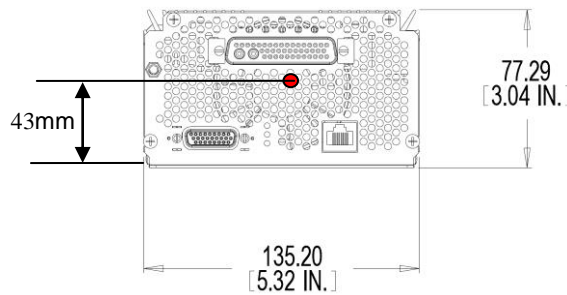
DA-630DC Outline Drawing, Weight & Balance
